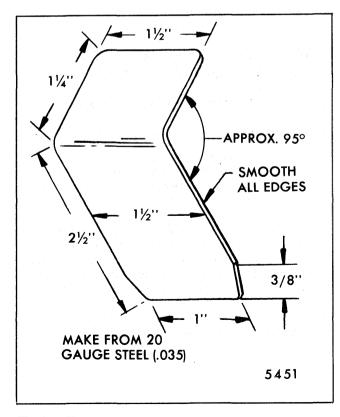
Head Restraint Anti-Removal Lock Releasing Tool
